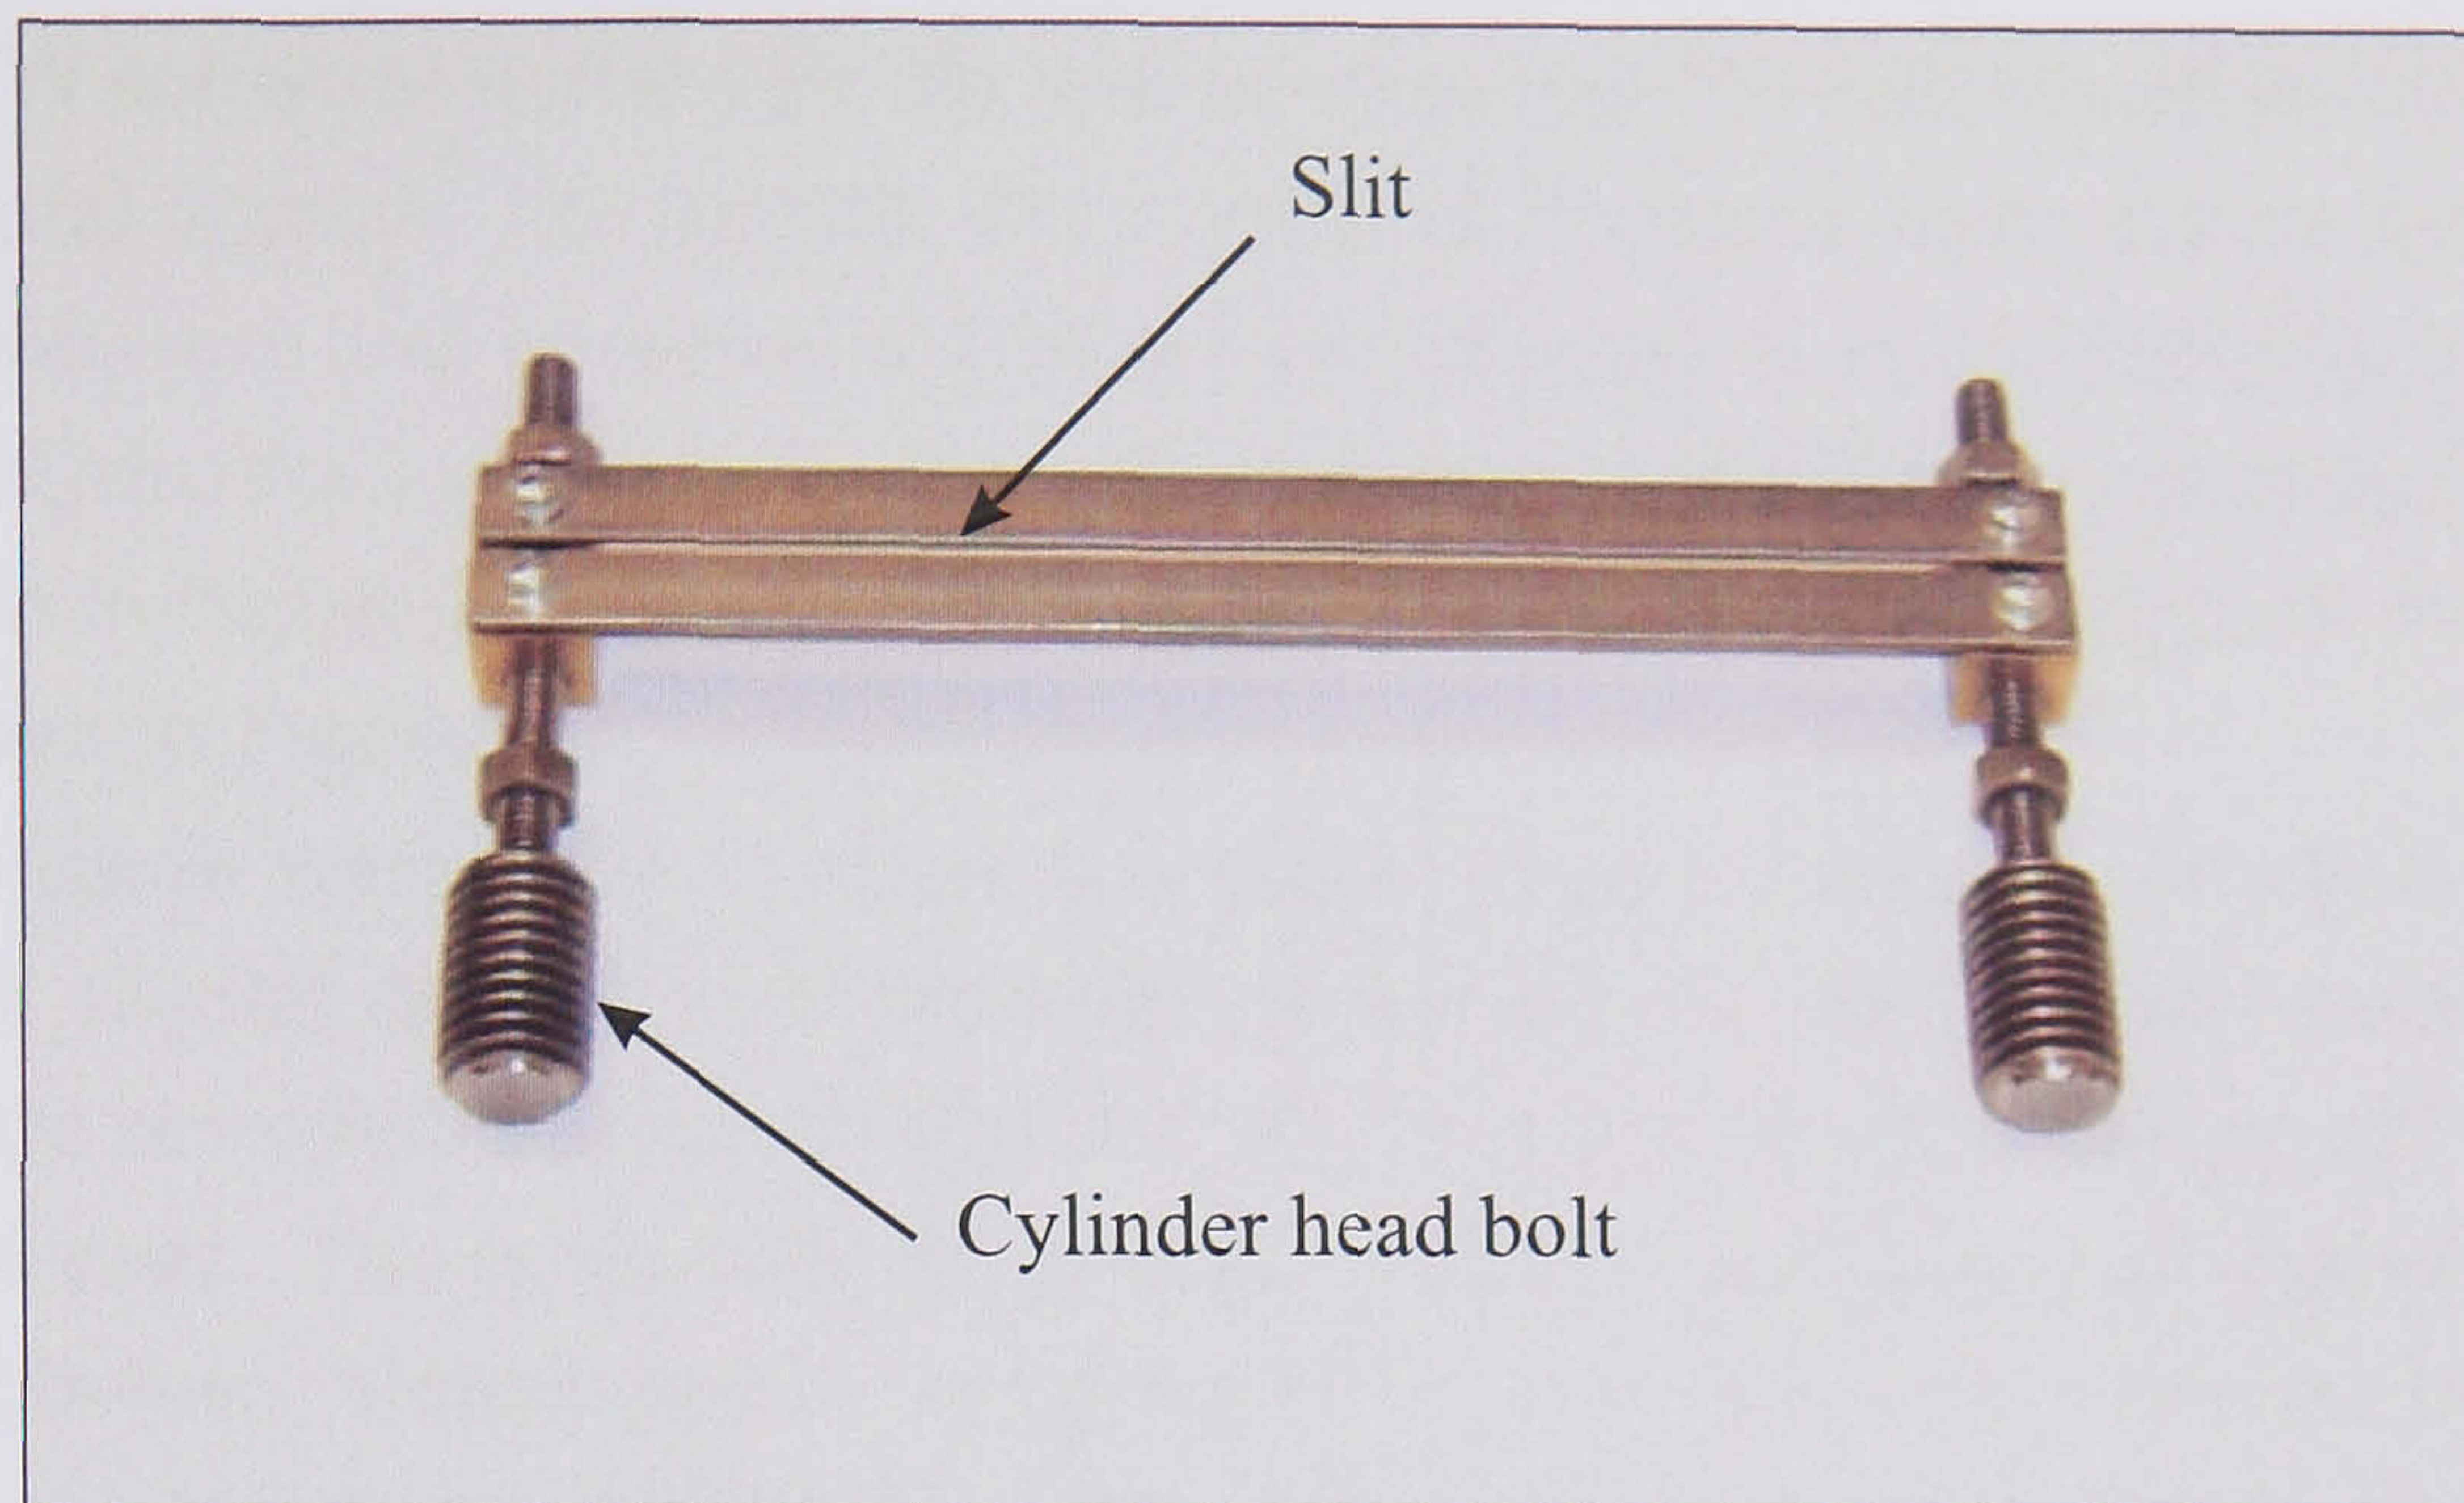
Tool used to set the height of the laser sheet above TDC.
